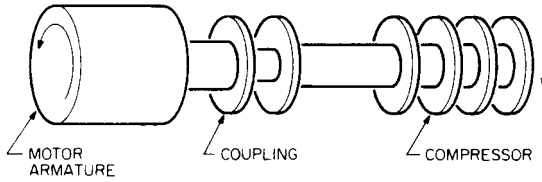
Schematic drawing illustrating the twisting of the shaft of a motor-compressor system.
